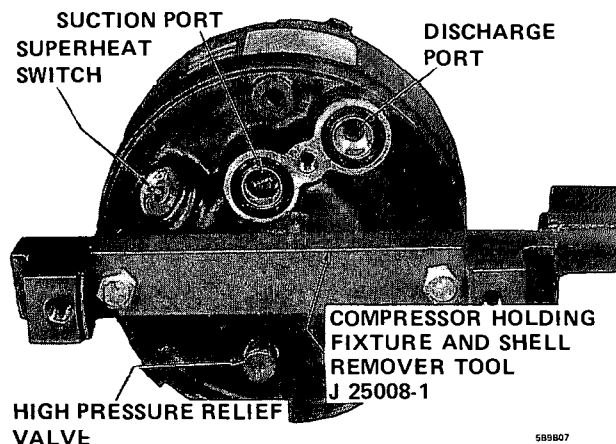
B-30 - Compressor Holding Fixture Attached To Compressor - 4 Cylinder
